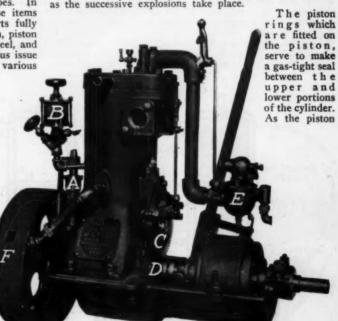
A typical four-stroke-cycle marine motor, parts lettered are circulation pump A, sight feed oiler B, timing gears C and D, carbureter E, and flywheel F
